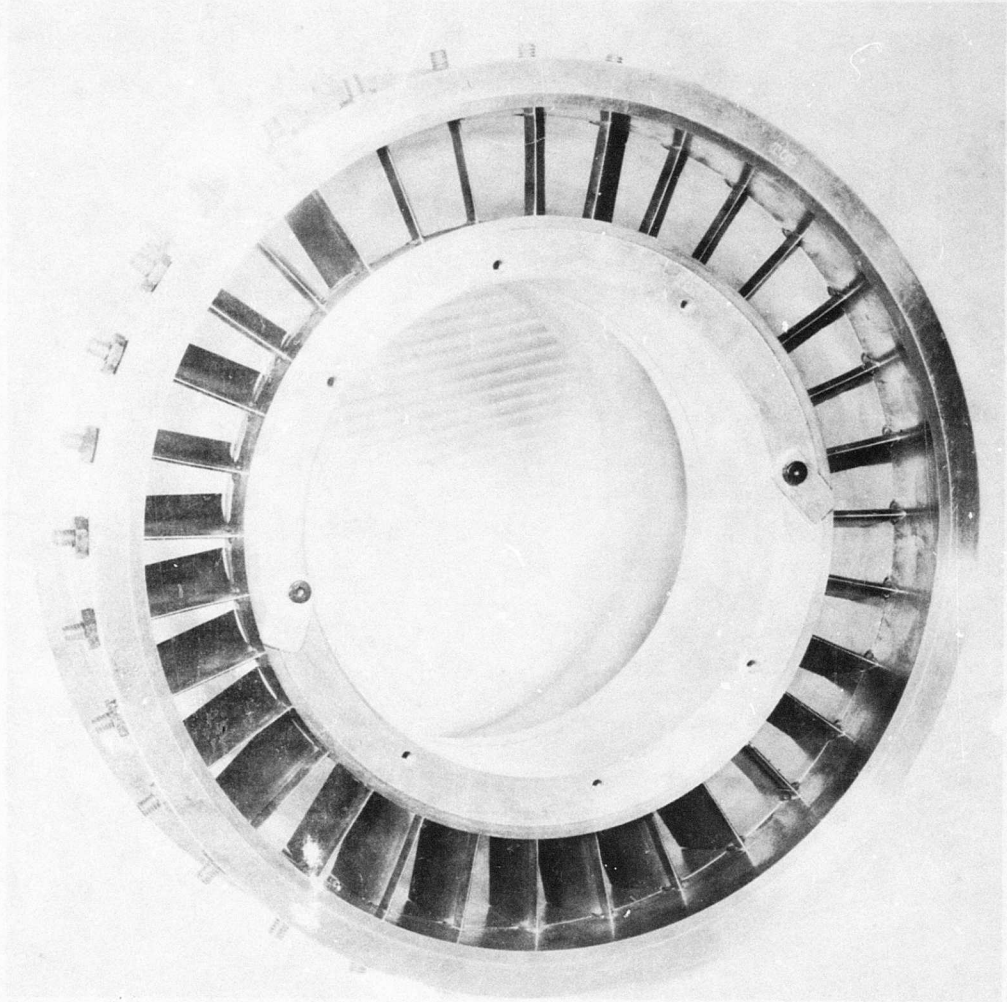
Upstream View of Inlet Guide Vane Assembly.
